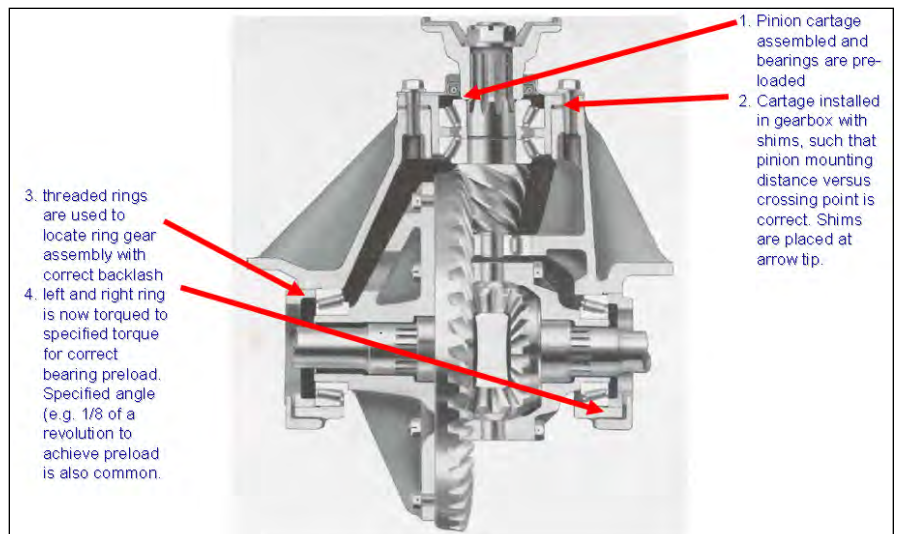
In Items 1 and 2 the axial position of the bearing pre-assembly must be achieved independently of the bearing preload arrangement with shims. After the pinion is in position the tapered roller bearings of the gear assembly are pre-loaded; at the same time the gear assembly is placed axially in the housing and the threaded rings (Items 3 and 4) are torqued.
